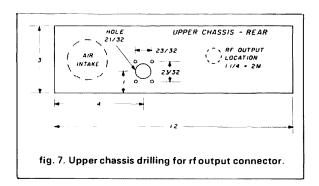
shows the upper chassis drilling required for mounting the plate coil, variable load capacitor, rf choke, fixed load capacitor, and tune and load controls. Fig. 7 shows the drilling and punching for the rf output connector. This completes the chassis preparation.
